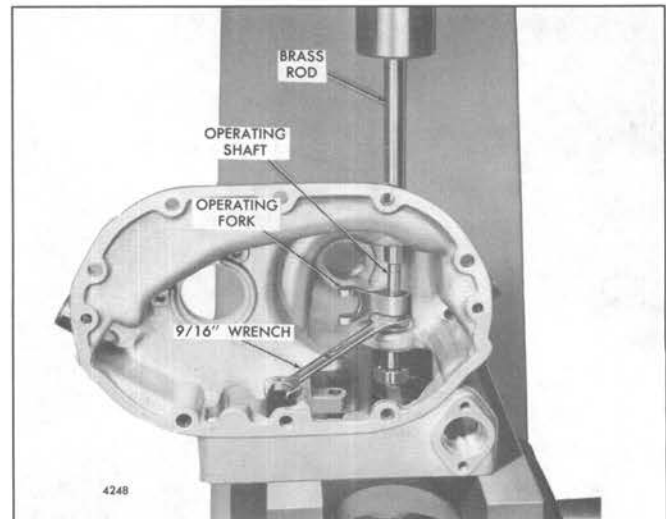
Removing Operating Fork Shaft and Lever Assembly from Governor Housing
